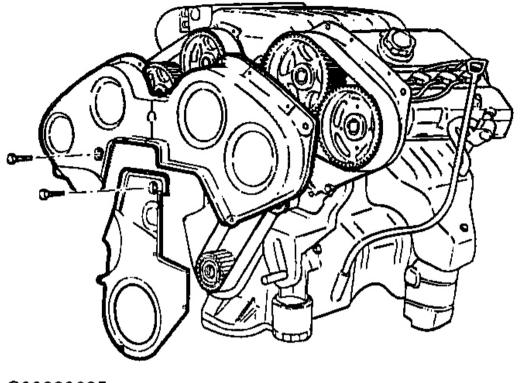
Removing The Upper & Lower Timing Belt Cover Courtesy of KIA MOTORS AMERICA, INC.
